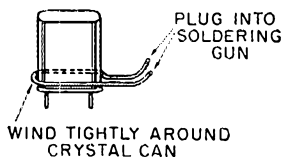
W3TLN's soldering gun crystal can opener. The regular soldering gun tip is removed and the crystal can removing tip is inserted in its place.
